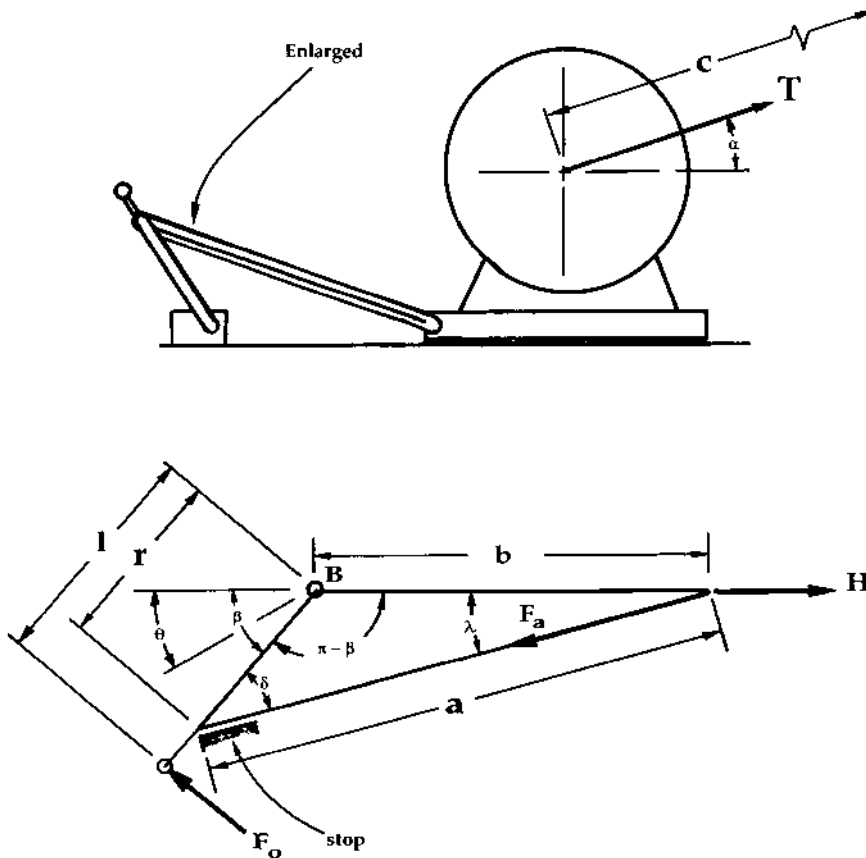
Upper drawing: enlarged sketch of sliding motor mount for a belt drive. Lower drawing: linkage geometry.
